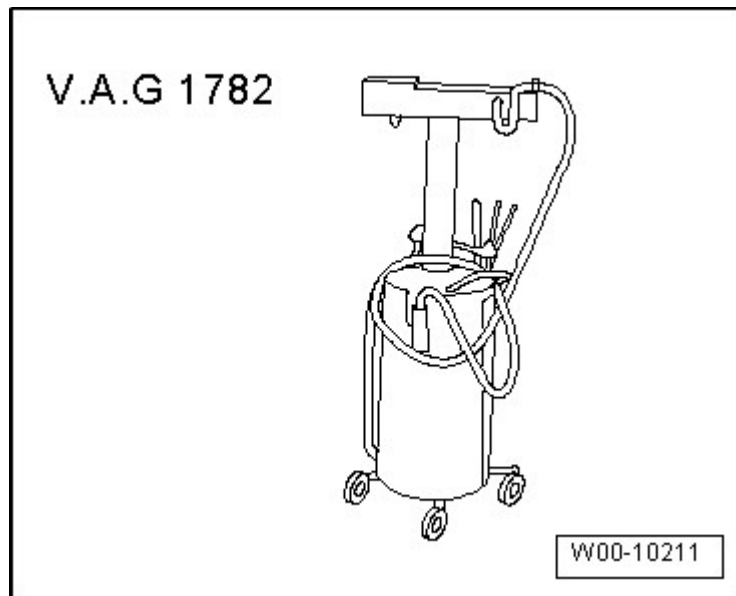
Old Oil Collecting And Extracting Device V.A.G 1782
